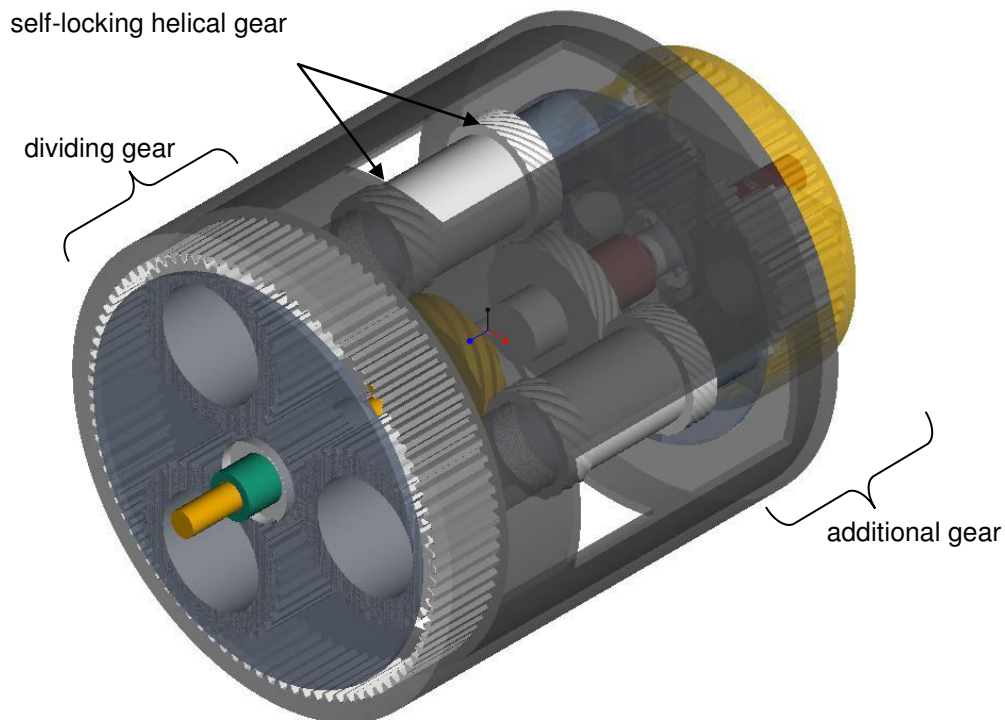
Self-locking helical gear and planetary gear parallel connection
